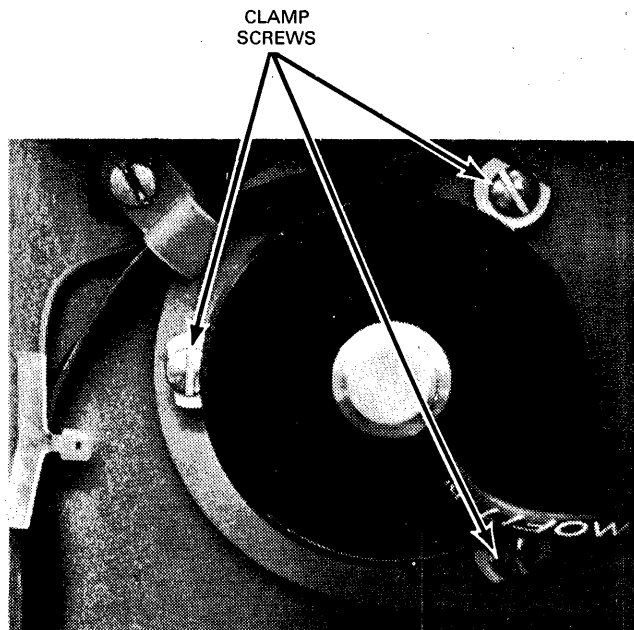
Head Position Actuator Clamp Screws (on rear of 651)
